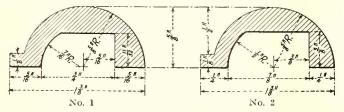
CROSS-SECTION OF CONTROLLER HANDLE BUSHINGS FOR TWO-MOTOR AND FOUR-MOTOR EQUIPMENTS
